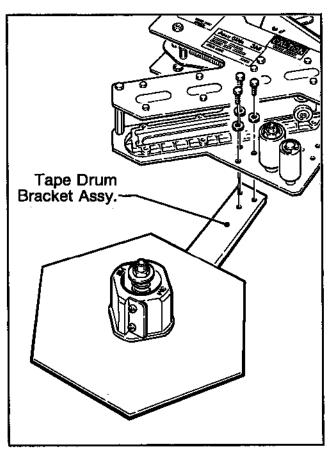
Tape Drum Bracket Assembly -Standard Mounting
